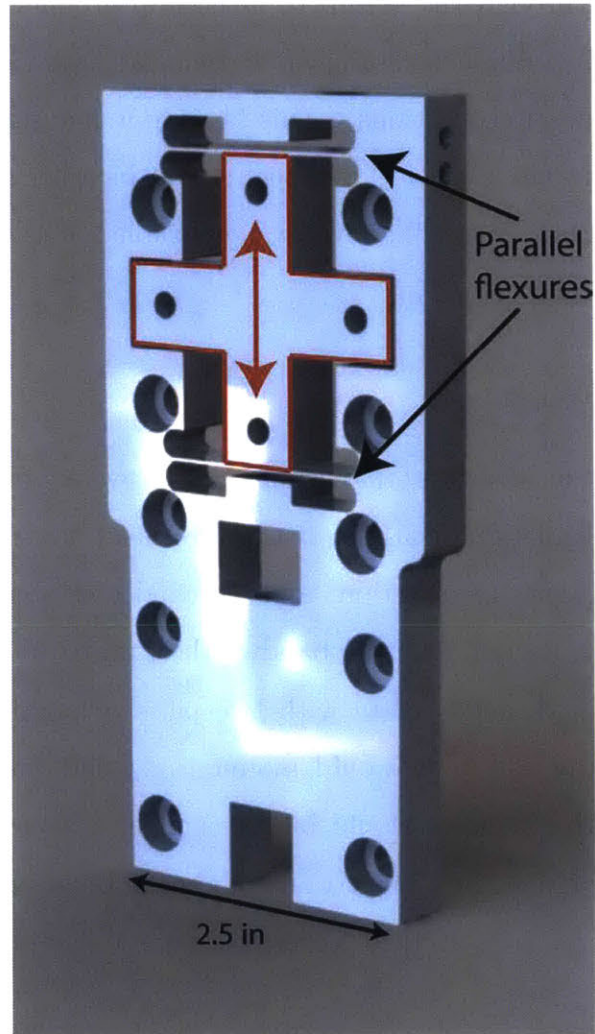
Flexural sensor final design.* The cross-shaped platform (red outline) moves under printing forces (red arrow). The sensor is constructed out of 6061-T6 aluminum.
